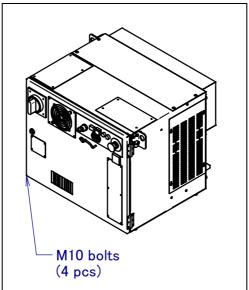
(c) Connection of ROBOWELD iC/H (Power Wave i400) (3/7)
